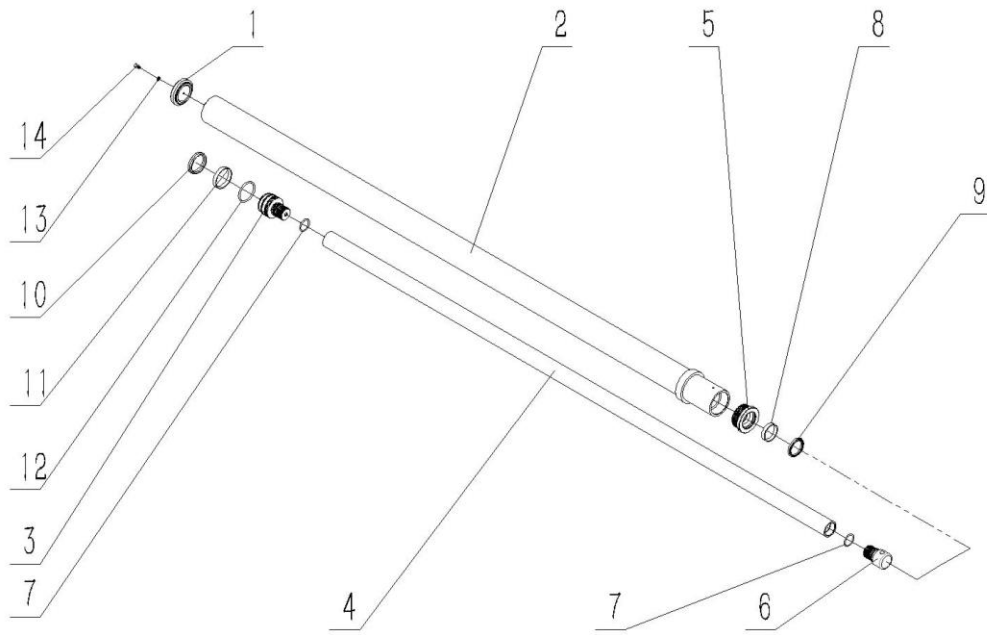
LTPO15 lift oil cylinder disassembly diagram
